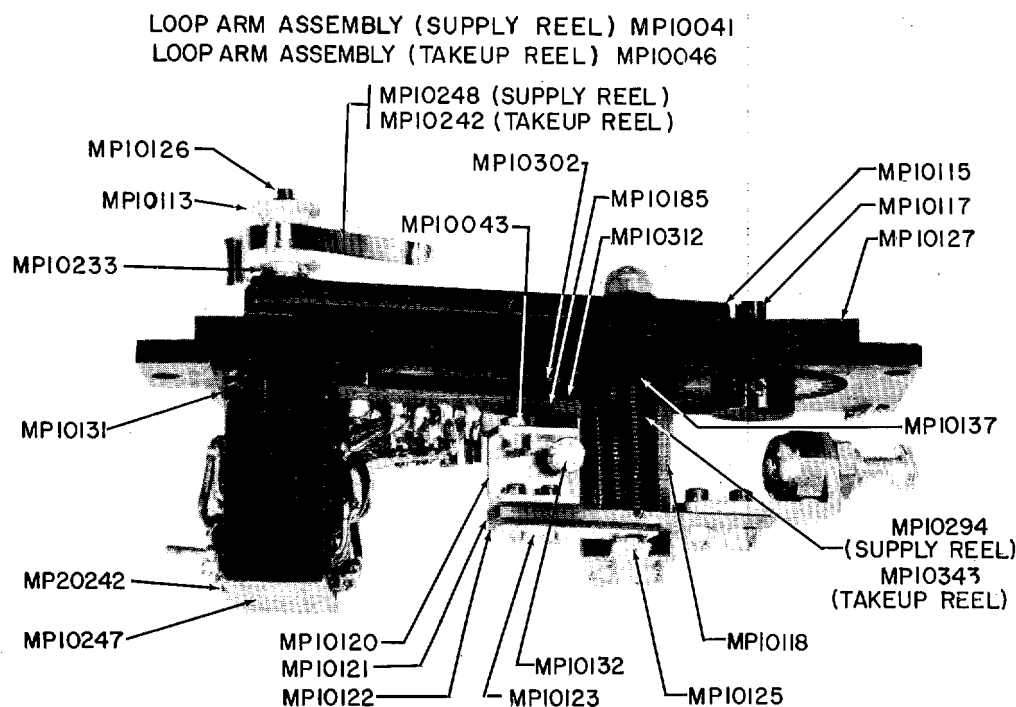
Loop-Arm Assembly, Parts Callouts
